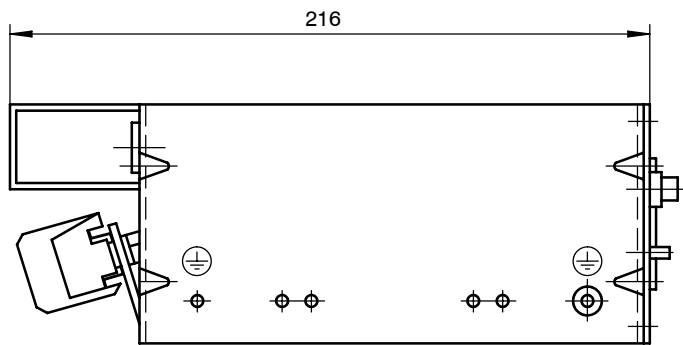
Dimension Drawing of Cabinet Connection Unit SAE 2
